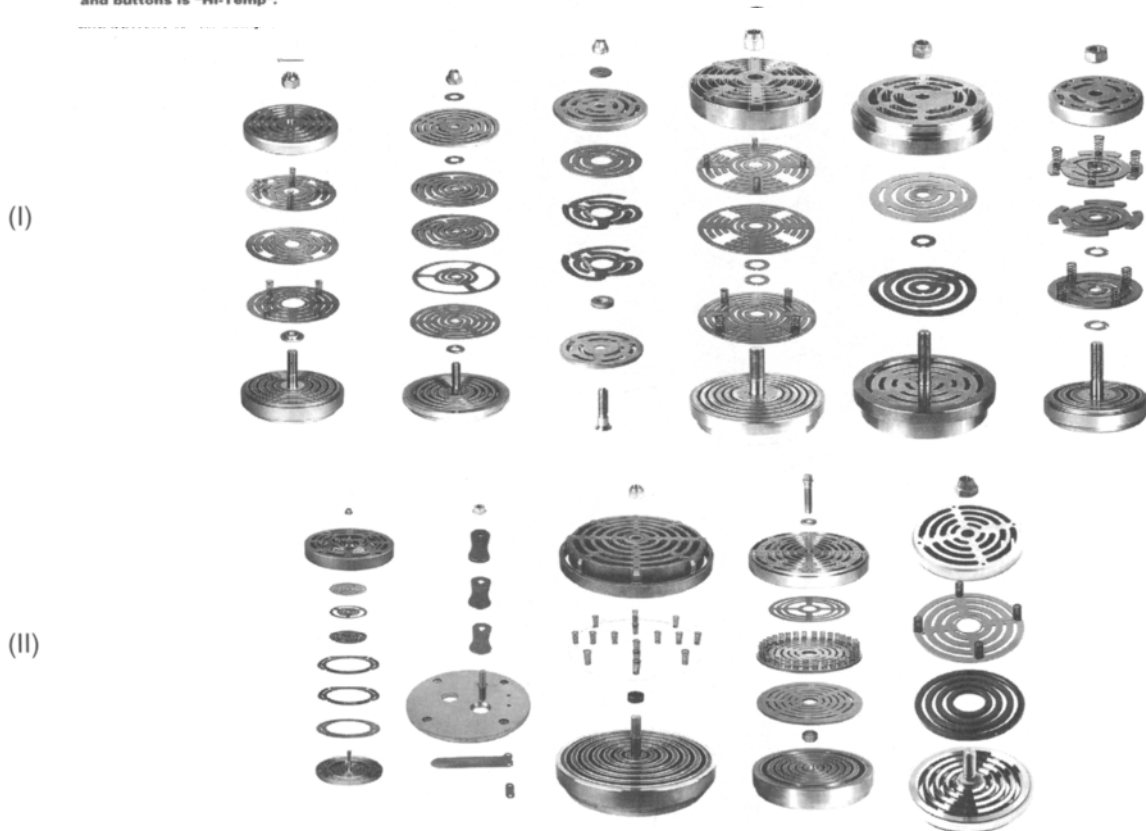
J. Variety of standard and special valves designed and fabricated by the Hoerbiger Corporation. Many of these designs are used in compressor manufacturer's cylinder designs, and some valves have been designed by the compressor manufacturer. (Used by permission: Bul. V-100A, ©1993. Hoerbiger Corporation of America.)
